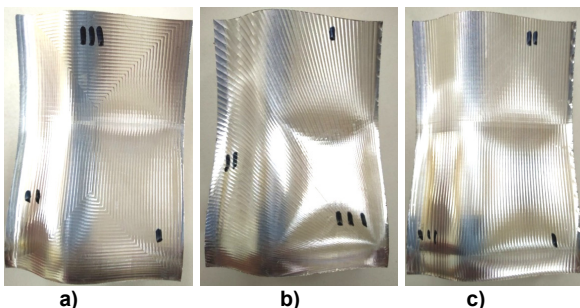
Machined workpiece and surface with marked zones: (a) EXP1, (b) EXP2, and (c) EXP3
